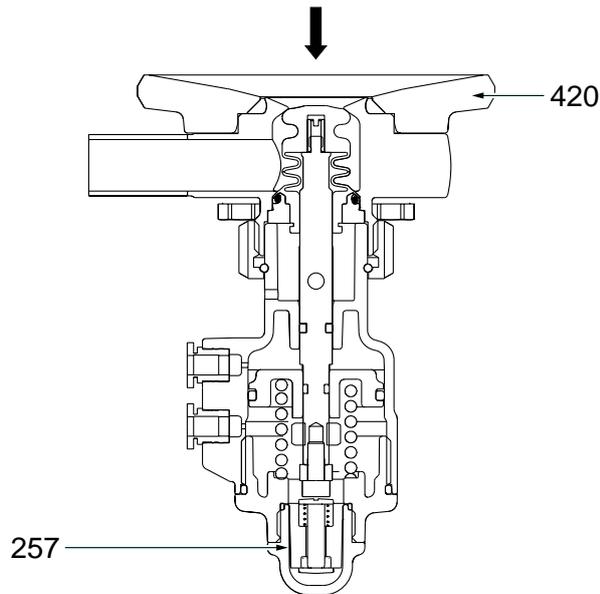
Valve for flange mounting, with position indicator, flow direction from the top
